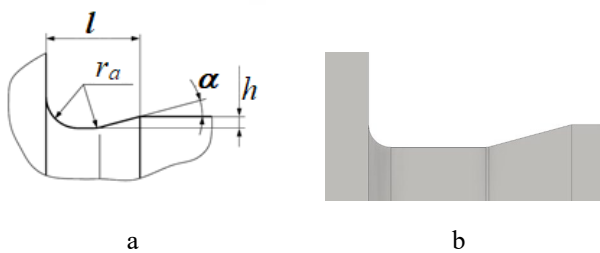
Shaft model with a grinding undercut: a – schematic with dimensions; b – 3D model.
